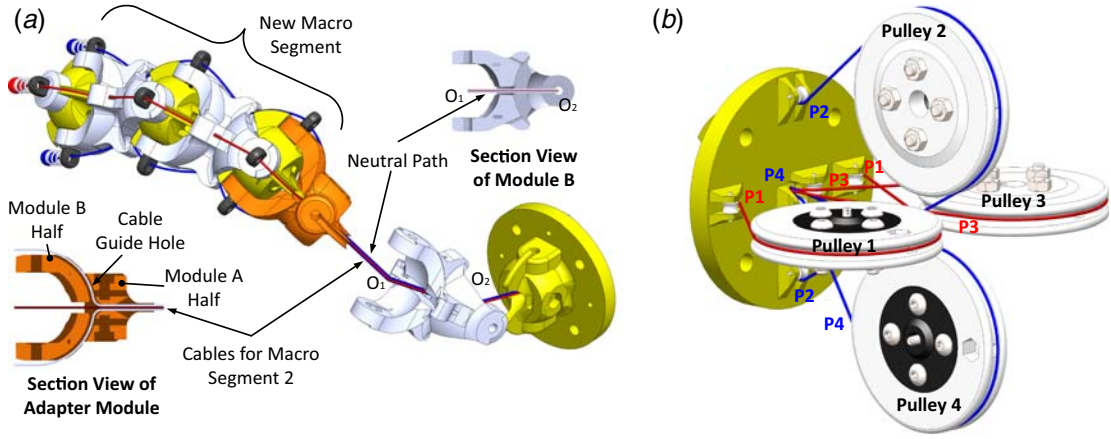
(a) Designs to achieve the multi macro segment feature and (b) the cable routing in the actuation module
